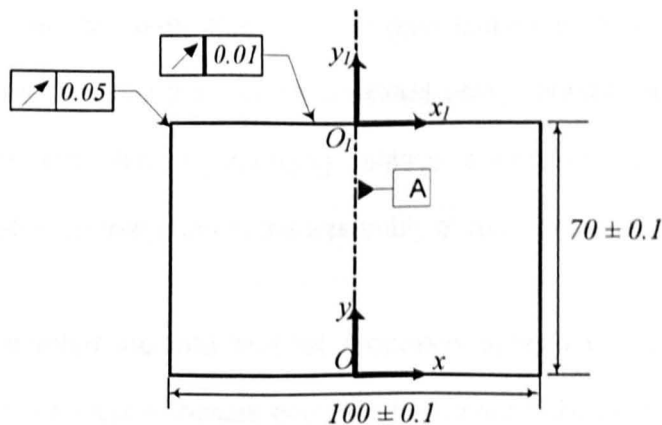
Dimensions and tolerances of 2D rectangular component
